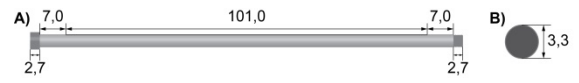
Dimensions of the ribbon burners, in centimeters: A) lateral view; B) front view.
